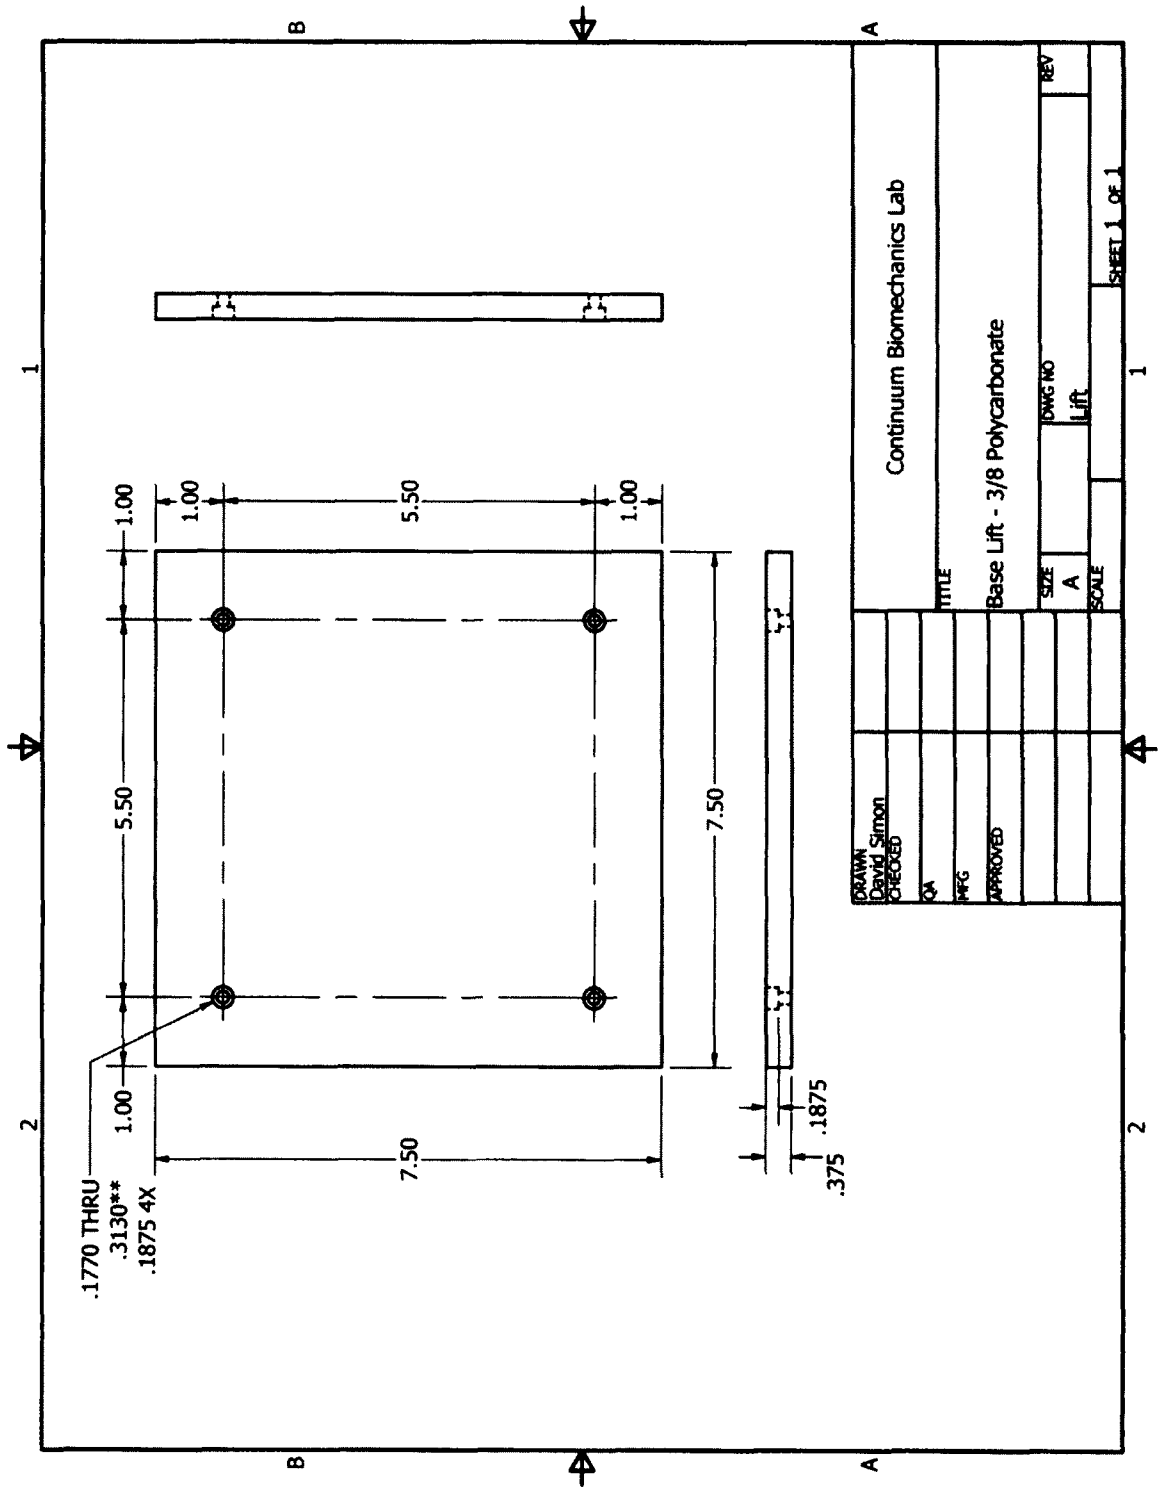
Bioreactor chamber baseplate technical drawing. This ensures proper alignment of loading arms connected to linear screw. Units are in inches.
